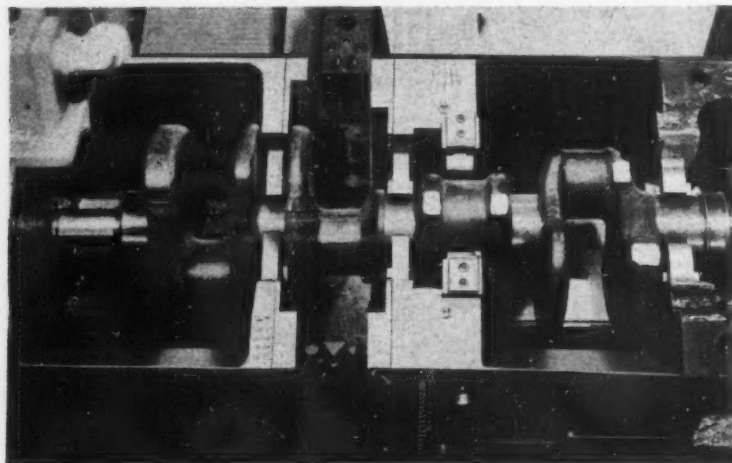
A Close-up View Showing the Crankshaft in Position in the Work Cradles on the First Lathe
